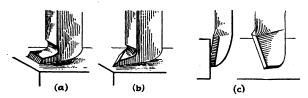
Tools for finishing cast iron. a, Shovel-nose; b, shovel-nose ground for shear cut; c, front and side views of side tool.
